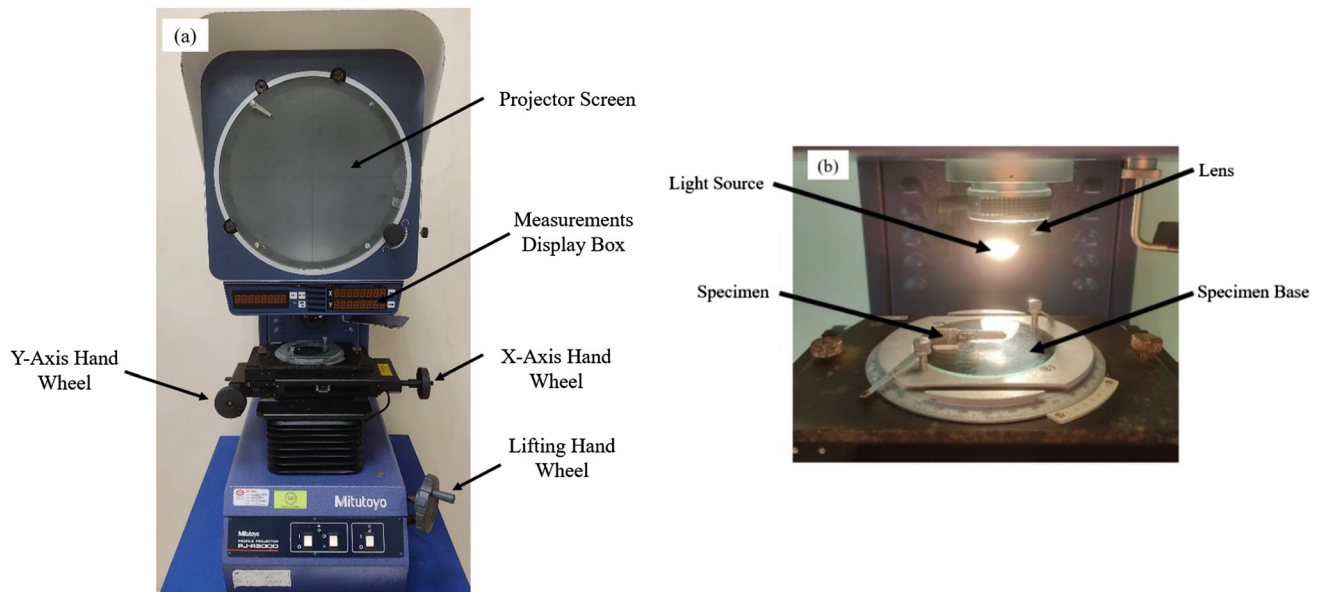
(a) Profile projector machine, (b) specimen during the measurement
